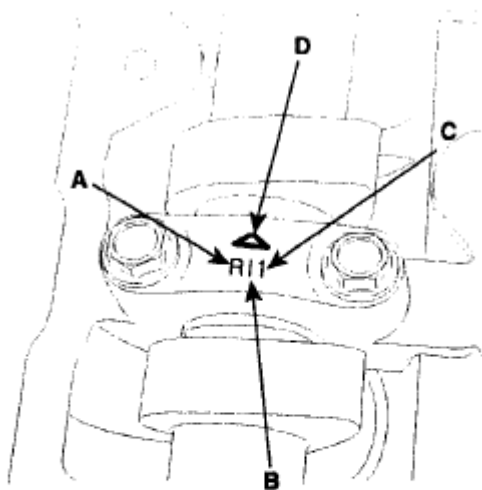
Identifying Camshaft Bearing Caps Bolts Tightening Sequence
